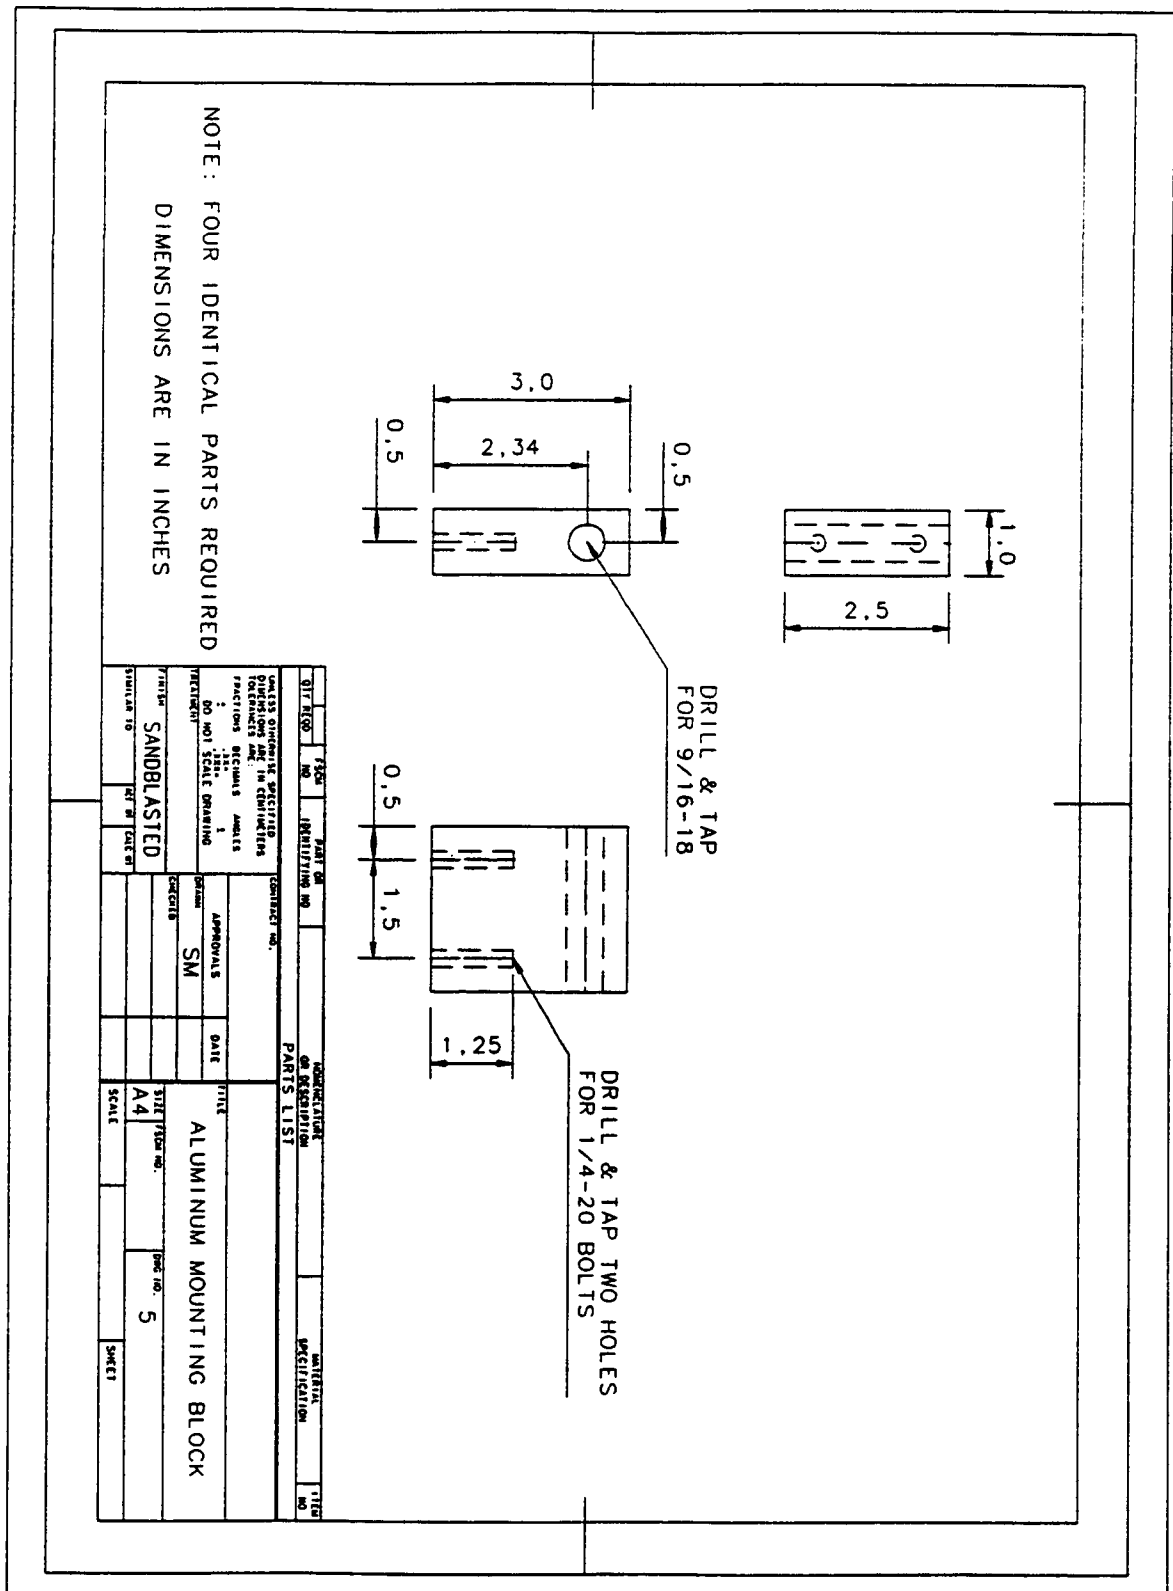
Mounting blocks (four) that each provide the housing for a viscous damper
